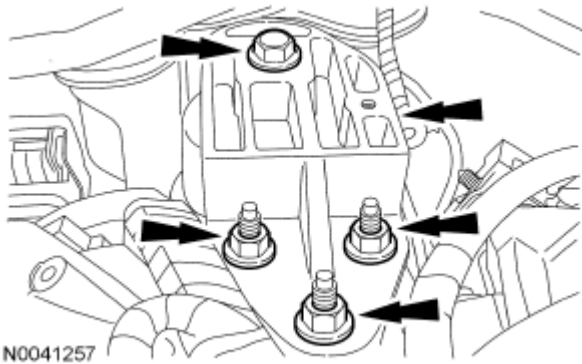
Locating Engine Mount Bracket, Nuts And Bolt
